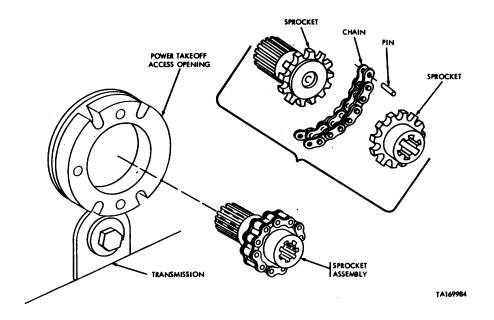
Disassembly or assembly of power takeoff sprocket assembly.
